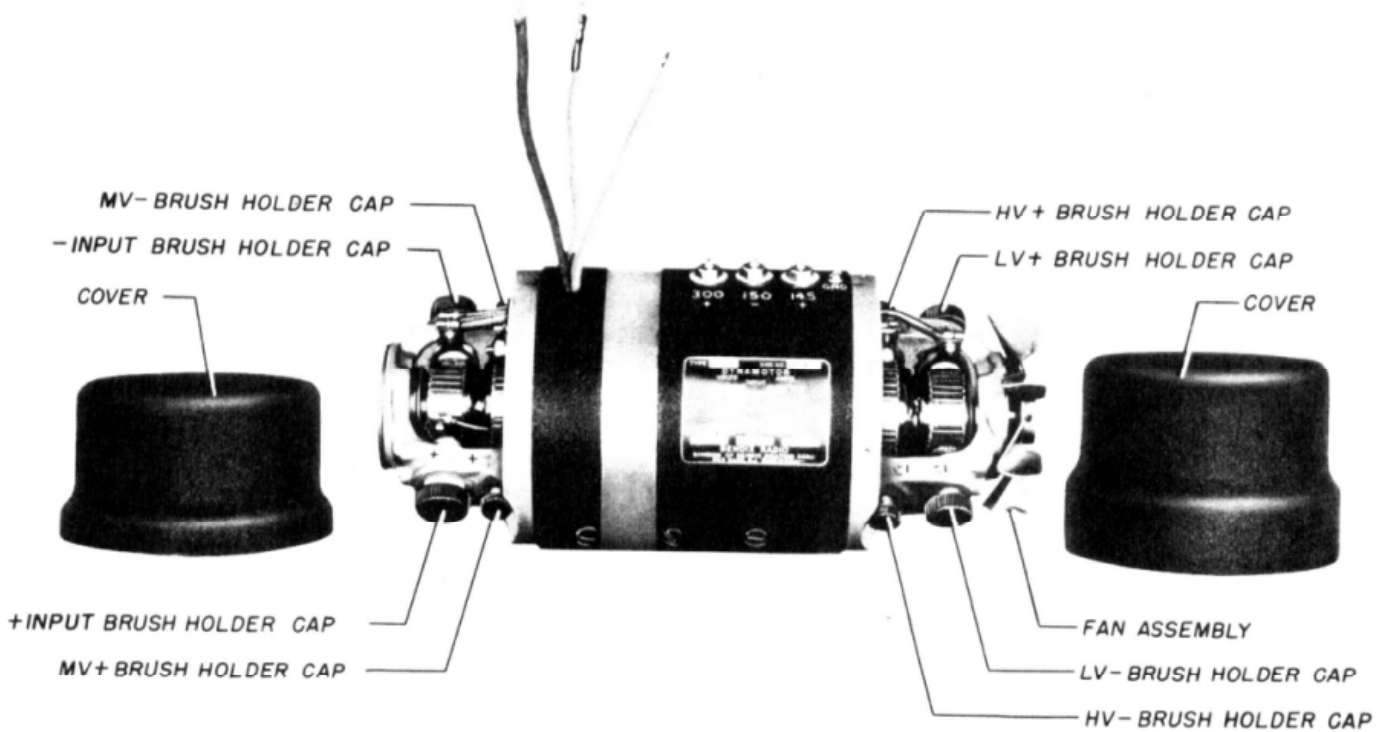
DYNAMOTOR UNIT PE-94-AM, END BELLS REMOVED
